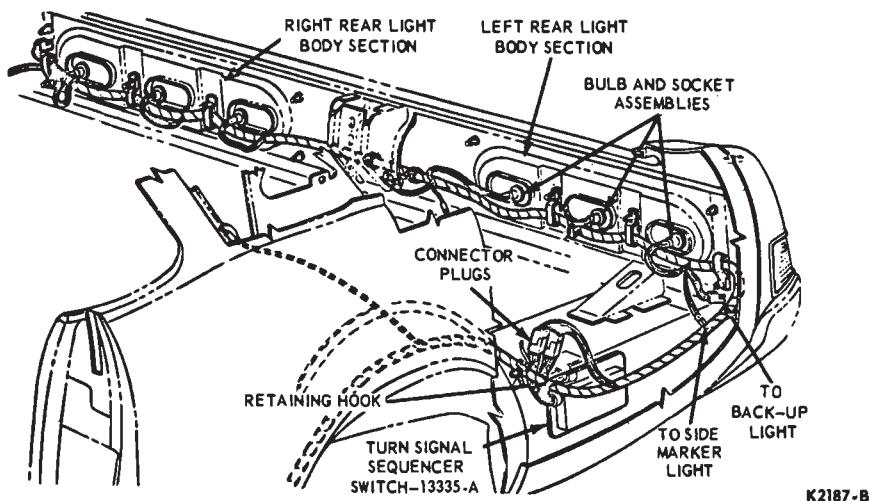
Cougar Rear Lights, Sequencer Switch and Wiring
